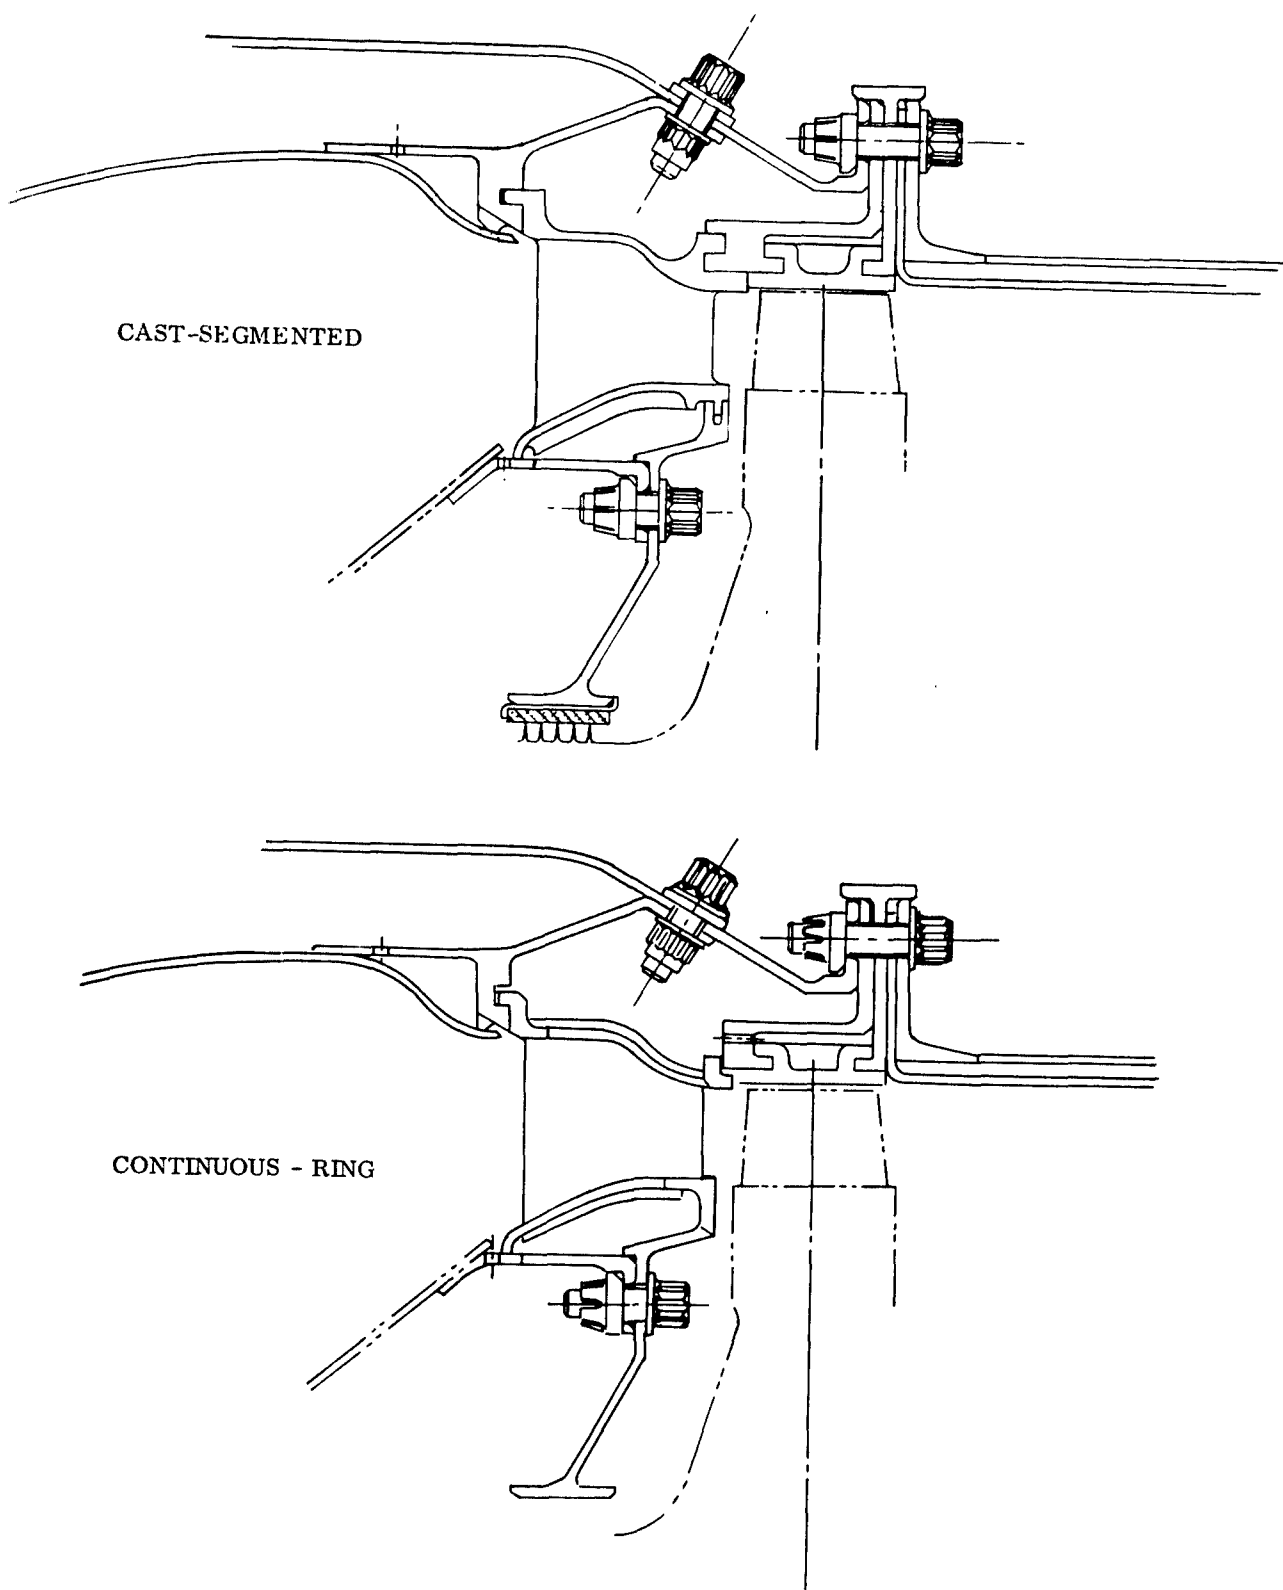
Cast-Segmented and Continuous-Ring Turbine Inlet Nozzle.
